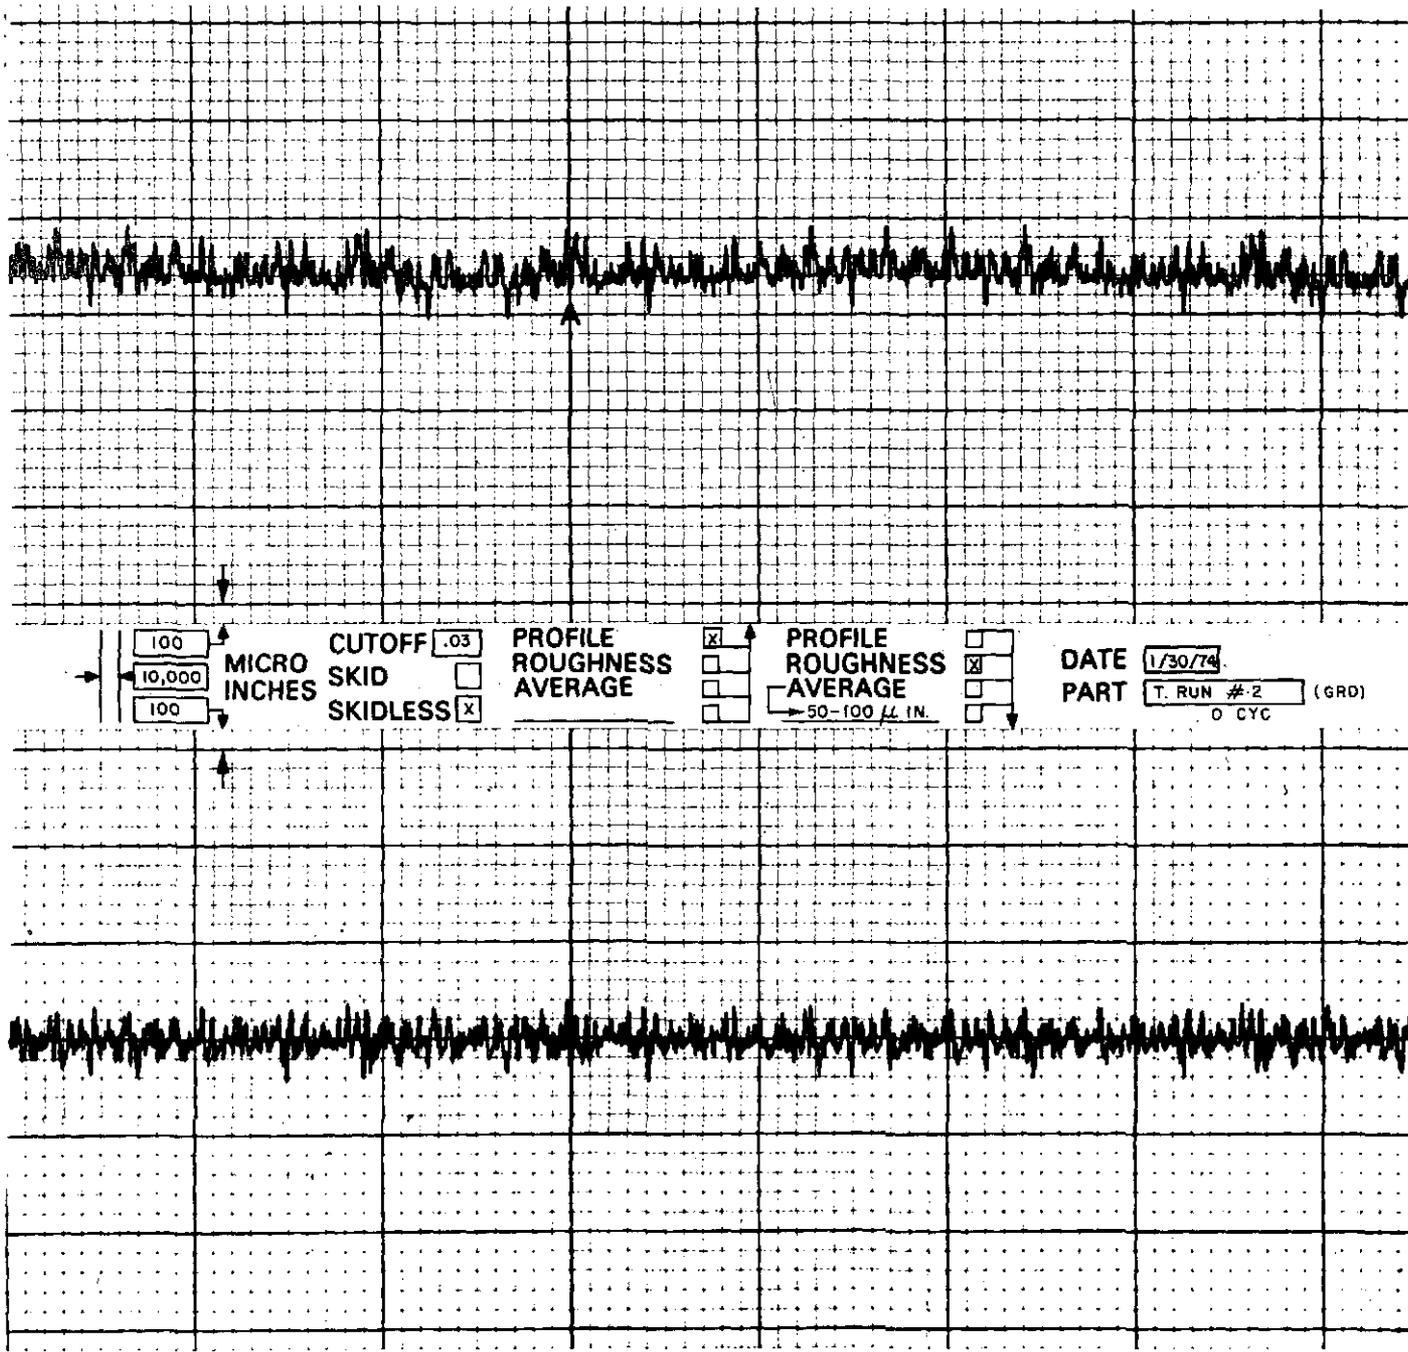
Groove Depth, Thrust Bearing No. 2
